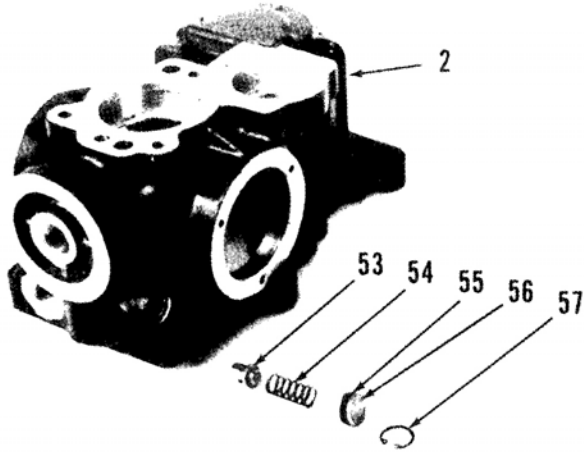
Exploded view showing charge relief valve located in transmission case (2).
